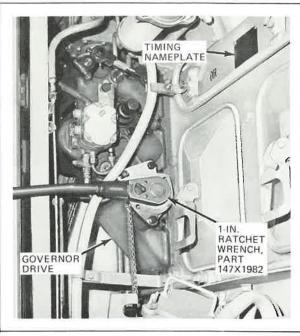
BARRING-OVER ENGINE USING A 1-IN. RATCHET WRENCH.
